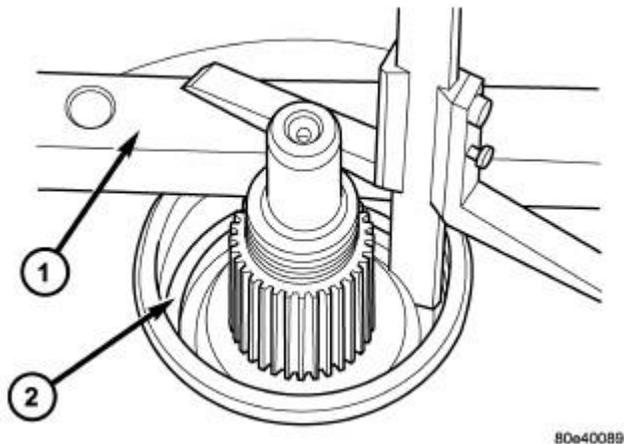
Measuring From Transmission Housing To Rear Bearing Contact Surface
